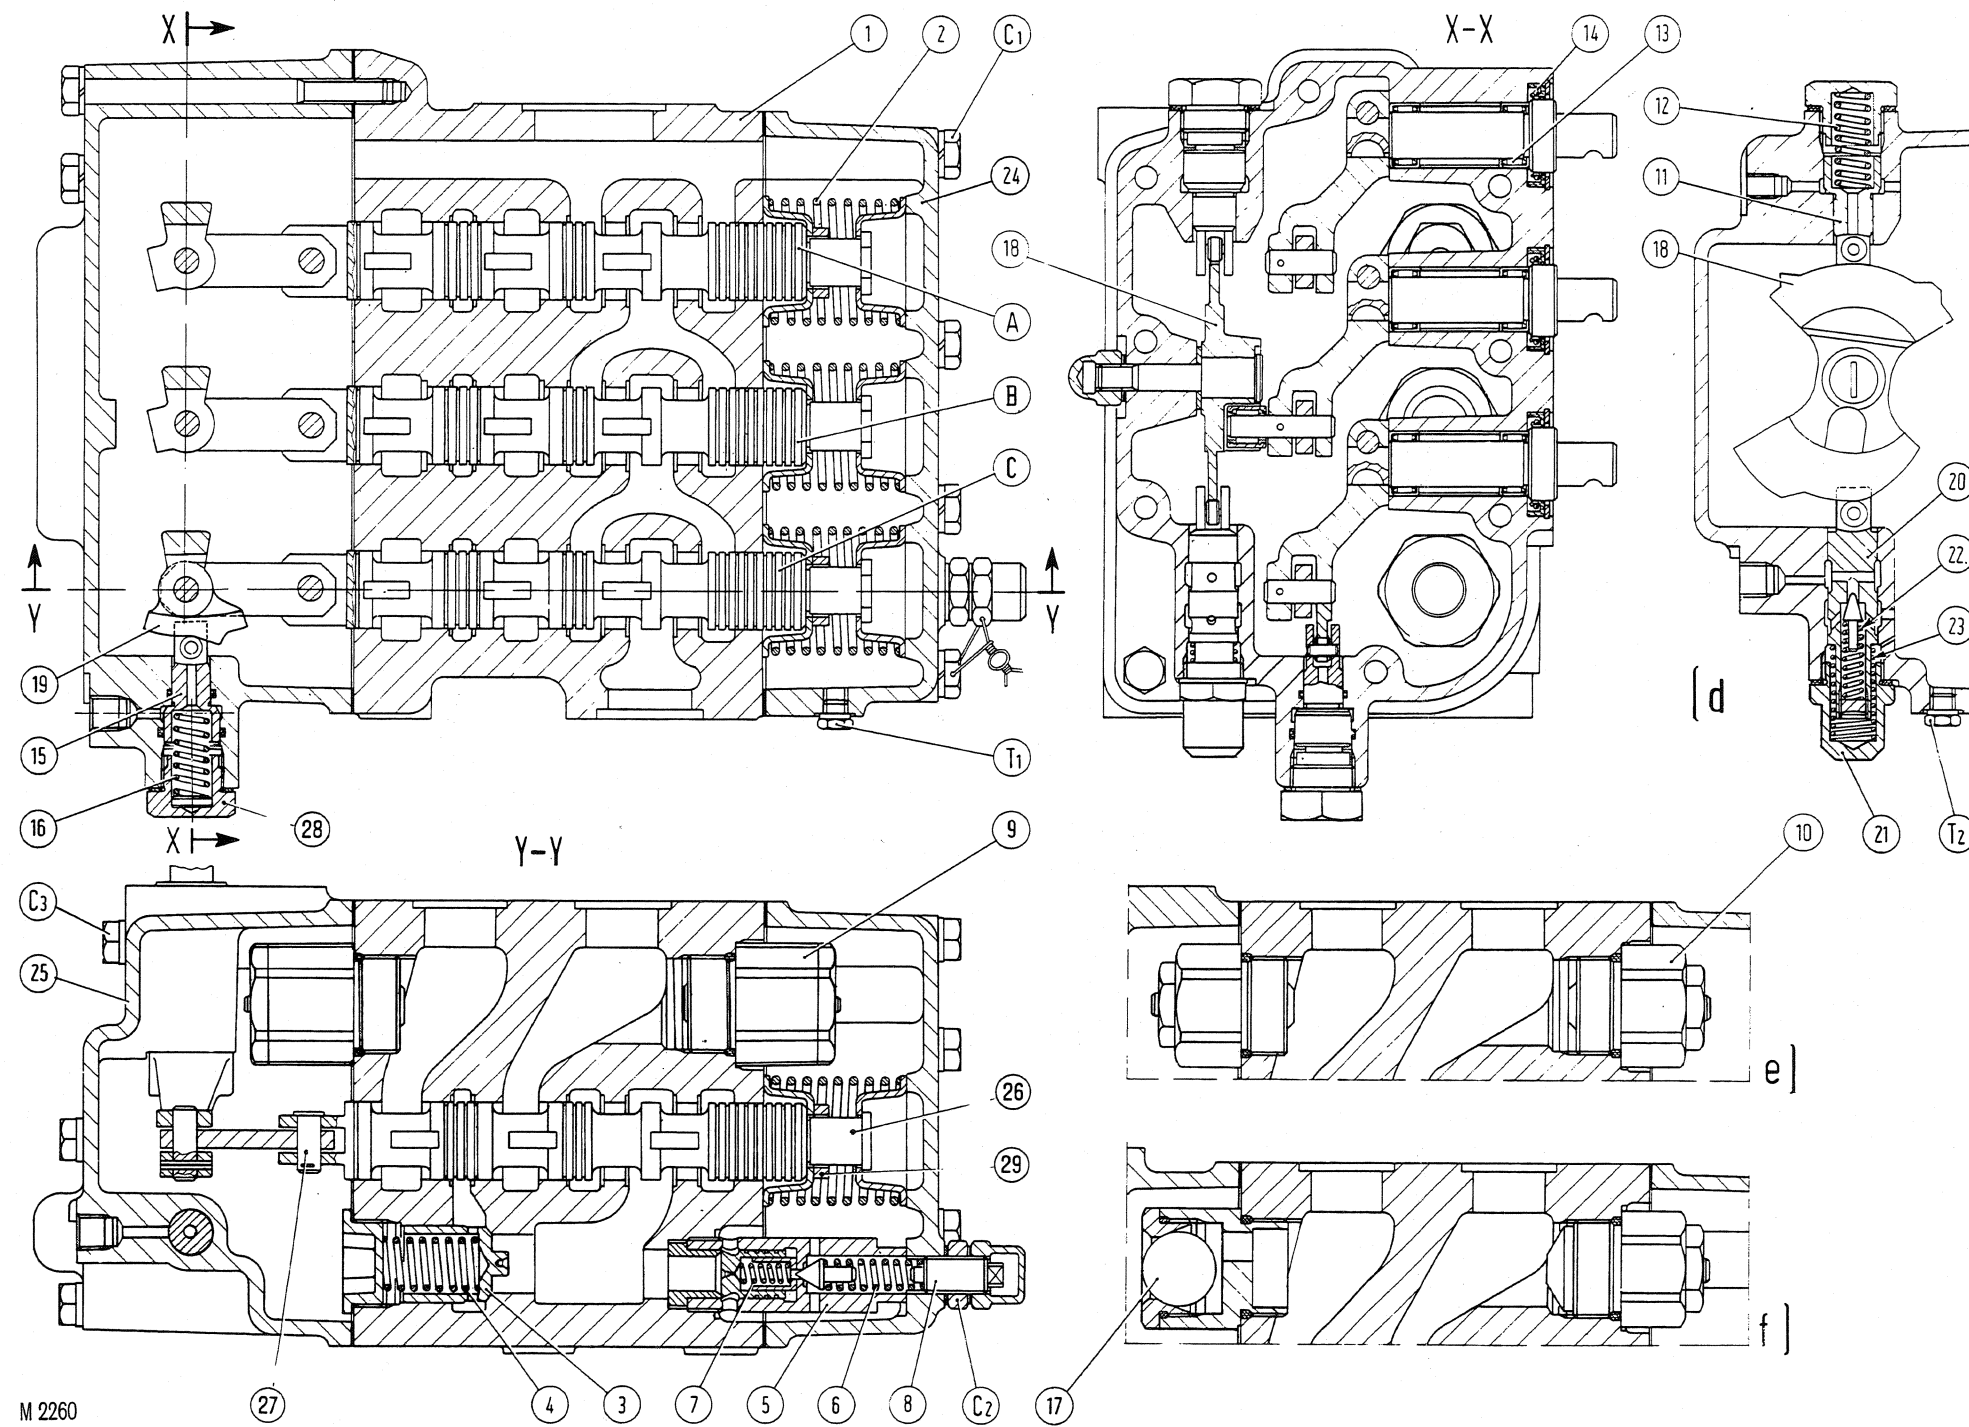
Loader hydraulic system control valve components and sections.
